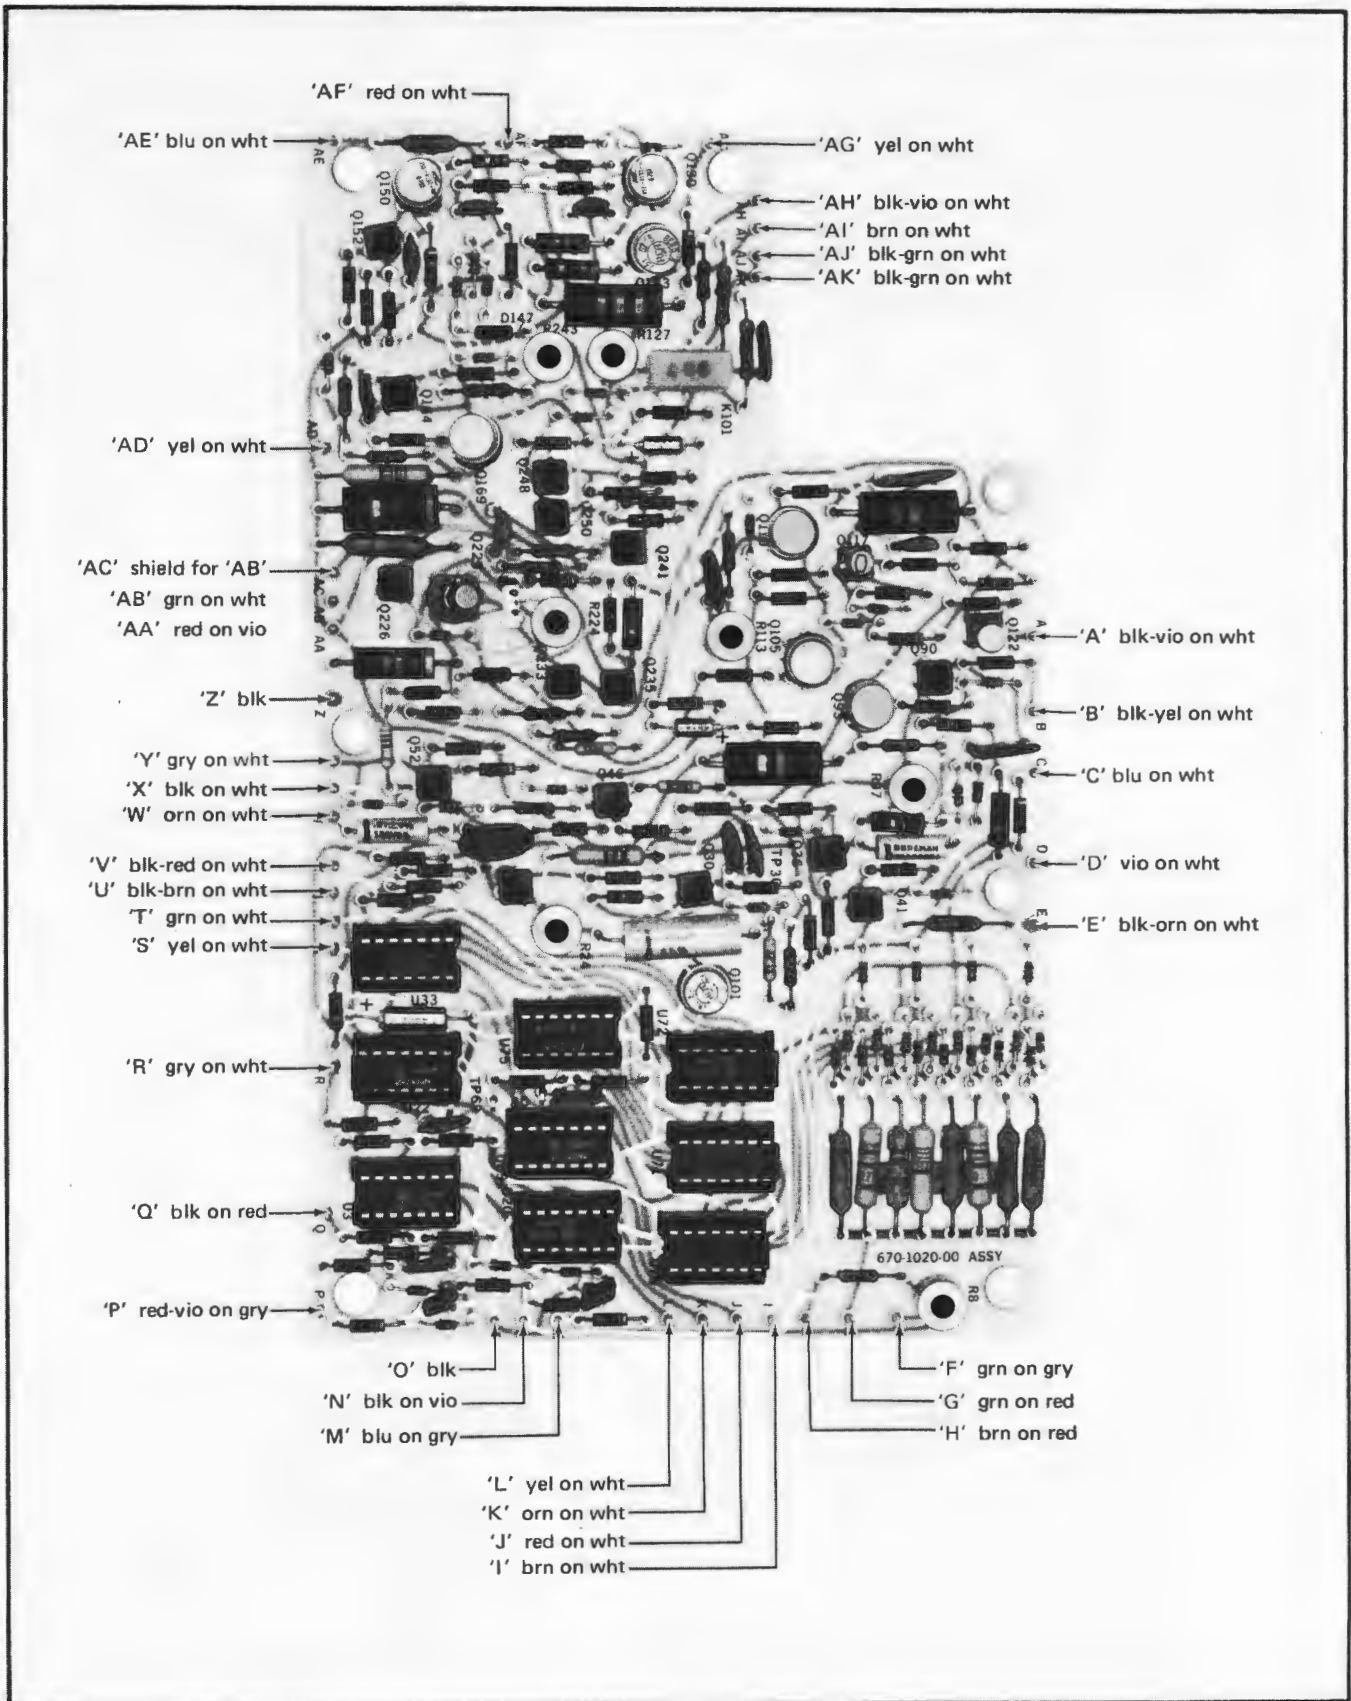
Wiring color codes on Step Gen circuit board.
